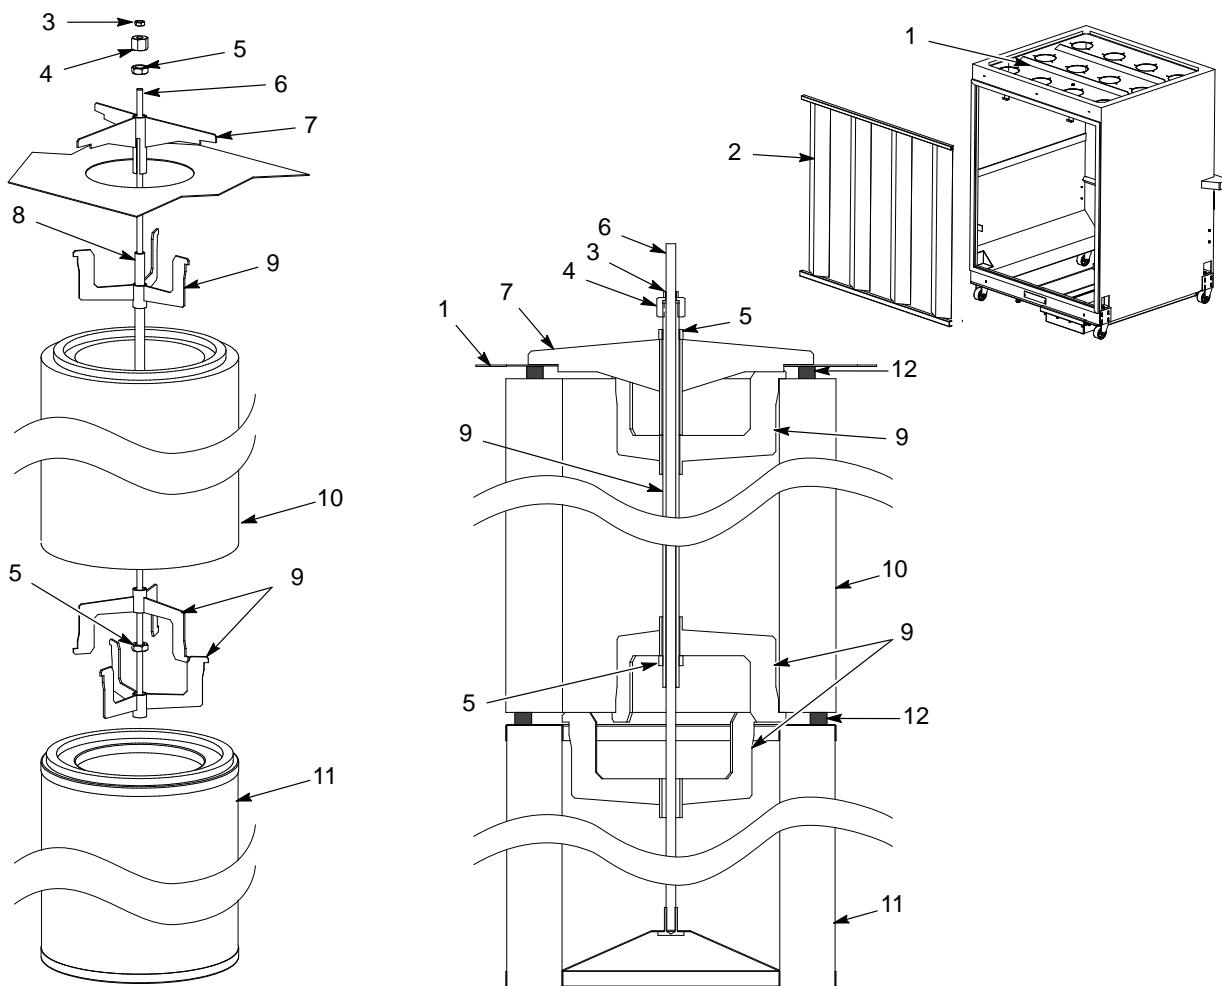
26-in. Double-Stack Cartridge Filter Replacement
